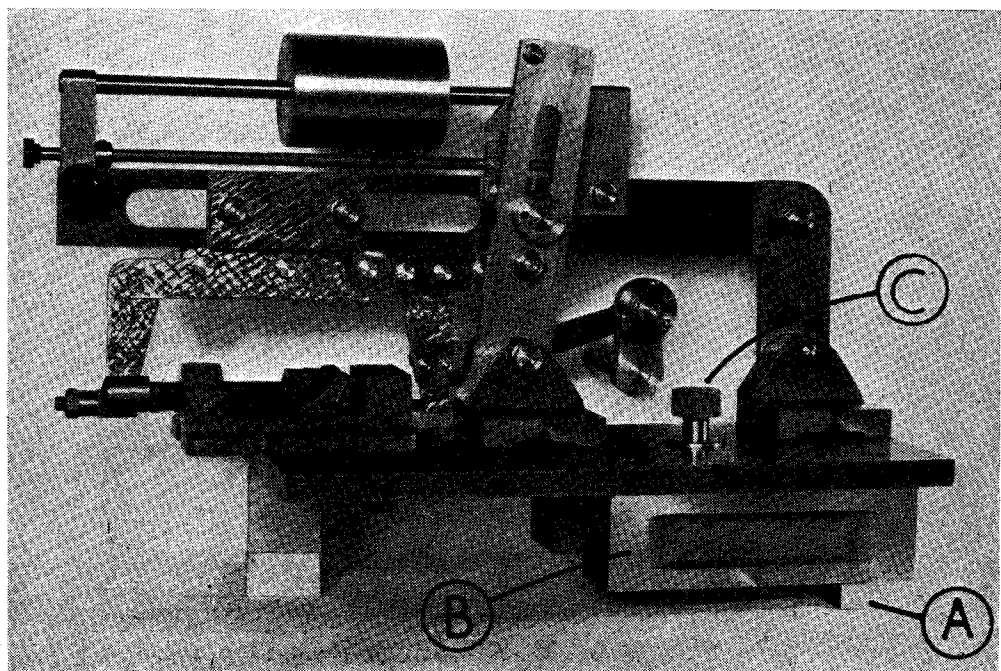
The machine seen from the back : "A"—the guide strip ; "B"—a raising block "C"—the clamping-nut
